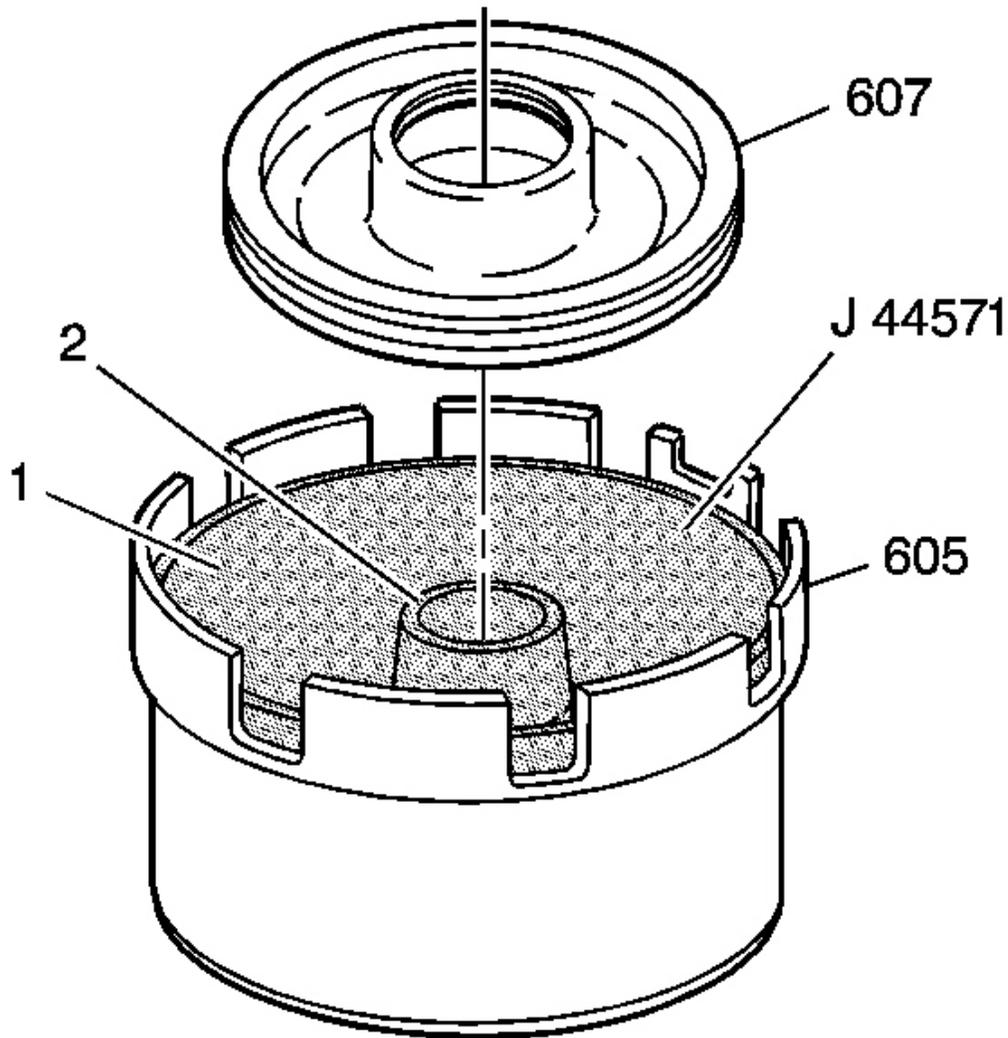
J 44571-1 Inner & Outer Reverse Input Clutch Piston Installer
